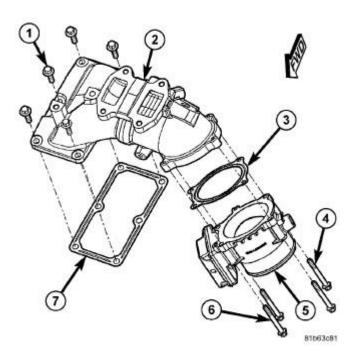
EGR Air Flow Control - Exploded View Courtesy of CHRYSLER GROUP, LLC
